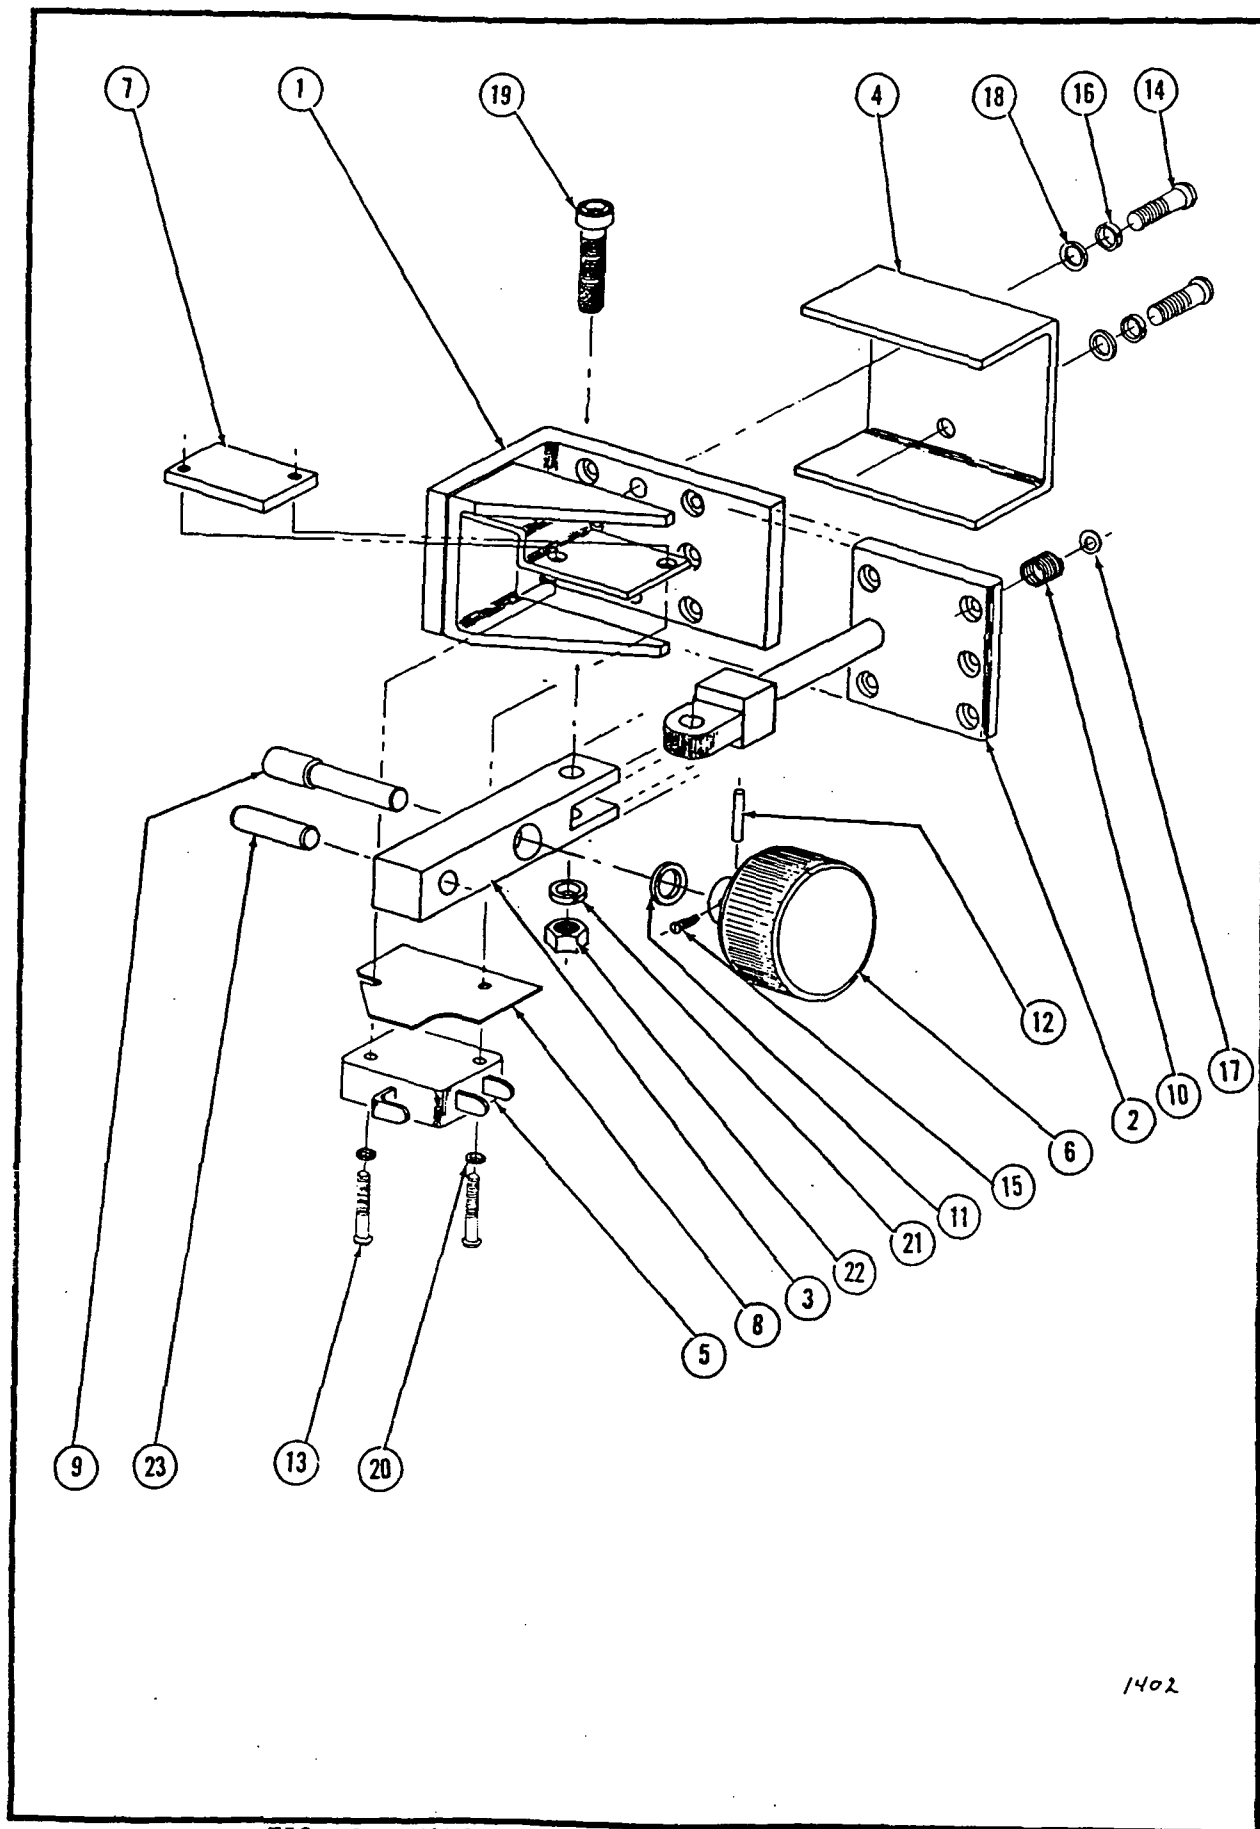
MOTOR MOUNT ASSEMBLY - Part No. 182095
